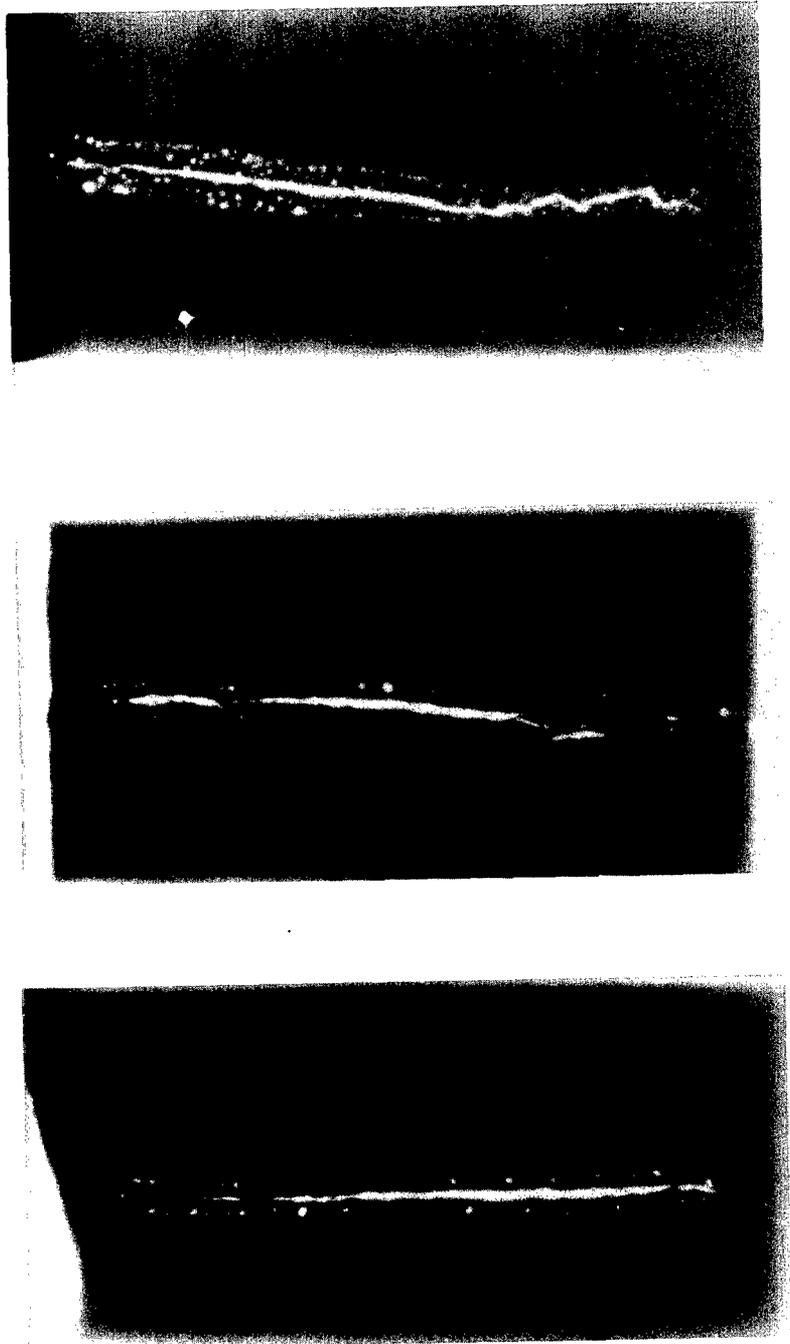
X-RAY PHOTOGRAPHS OF WELD BEADS ON NON DEOXIDIZED SINTERED MOLYBDENUM WELDED IN A HE. ATMOSPHERE.
